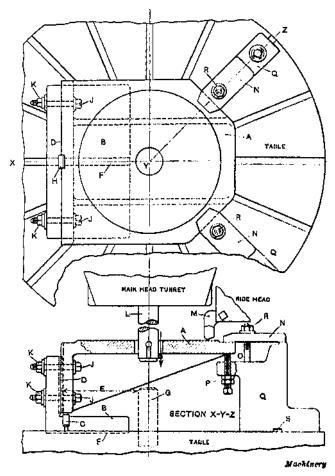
Inexpensive Fixture for Holding Two Sizes of Brackets
